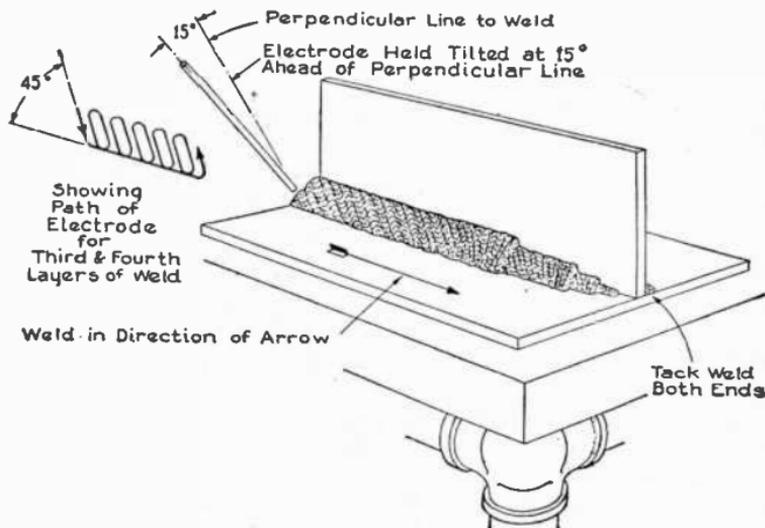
,093.—*Lesson 9. Single fillet T weld.* Clean and uniform surface, indicating penetration into plates at edges of weld. No signs of porosity. Surface of weld should be flat across, not re-enforced or concave. Clean surface of each layer with hammer and chisel, and brush before depositing a succeeding layer. *Instructions:* In making the first bead, the electrode should be moved slowly across the plate, advancing as fast as necessary to keep the proper height of the deposited metal, which should be approximately  $\frac{1}{4}$  in. Since the weld is being made in the middle of the horizontal plate, the heat will be conducted away in both directions by this plate, and, therefore, at a greater rate than by the vertical plate. The crater should be established at the juncture of the two plates, with the greater portion on the bottom plate.
